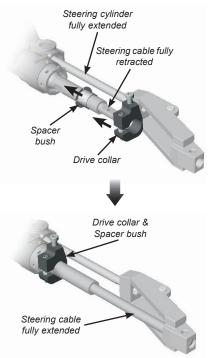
Fitting the drive collar and bush to the steering cable sleeve
